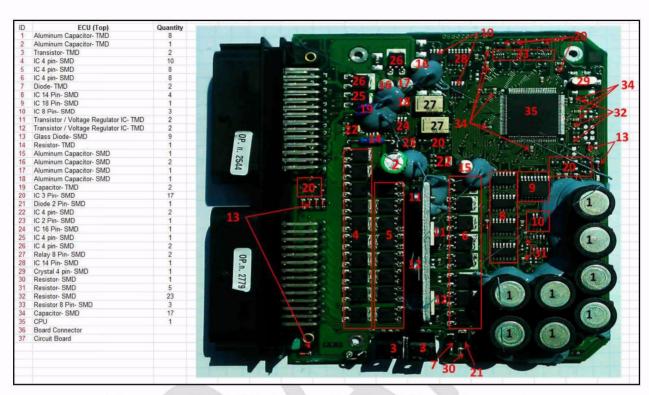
CNG ECU Board with Circuit ID numbers - Top
